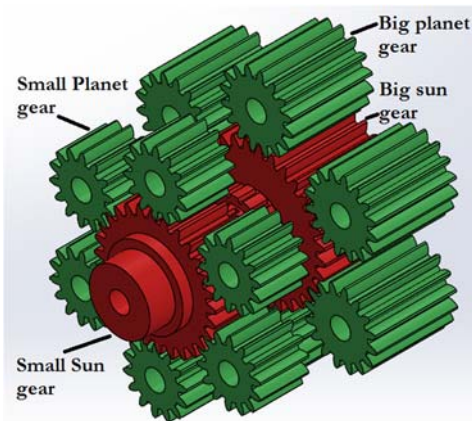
PLANET GEARS IN MESH WITH SUN GEARS.
